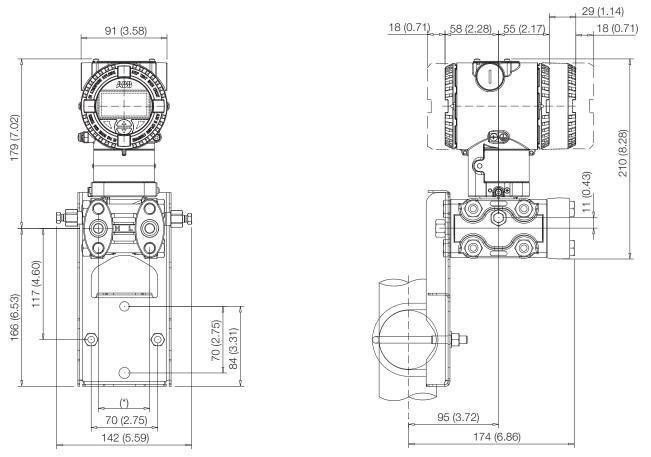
Differential Pressure Style transmitter with barrel housing installed on a box pipe with optional bracket for SST housing (B5)
